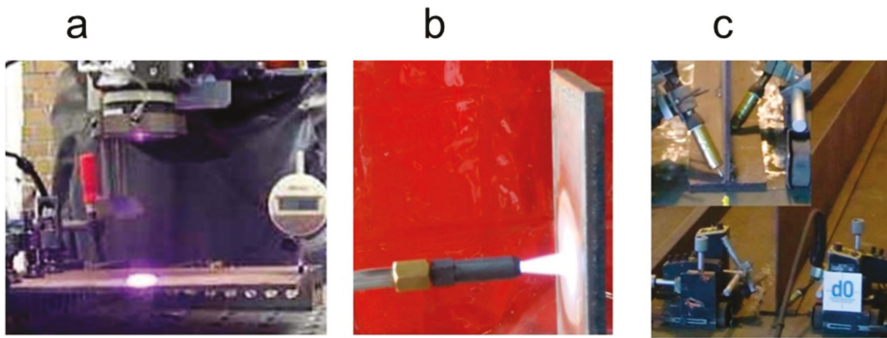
Experimental procedures, (a) heatline laser forming process; (b) propane heating process; (c) flux cored arc welding (FCAW) welding process.
